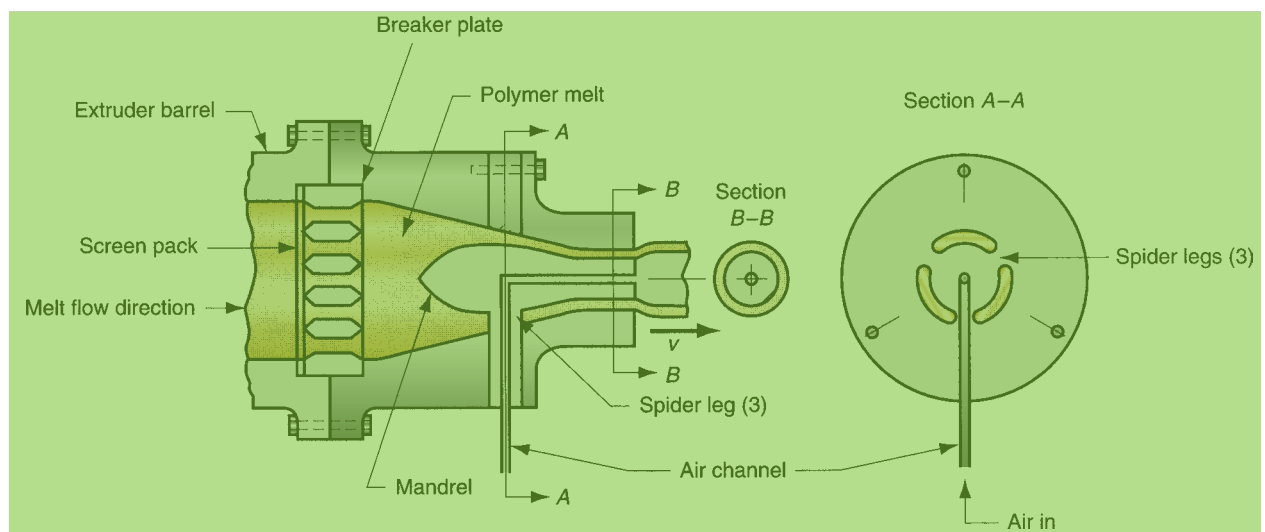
Side view cross section of extrusion die for shaping hollow cross sections such as tubes and pipes; Section A-A is a front view cross section showing how the mandrel is held in place; Section B-B shows the tubular cross section just prior to exiting the die; die swell causes an enlargement of the diameter. (Some die construction details are simplified.)
